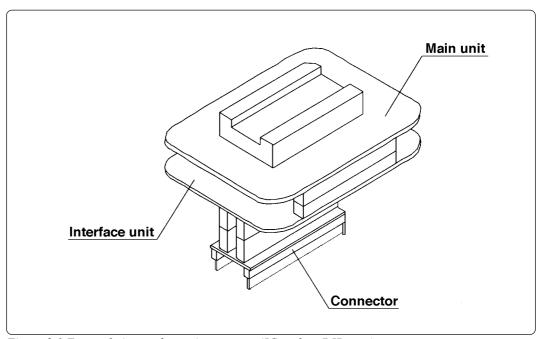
External view and constituent parts (IC socket: DIP type)
